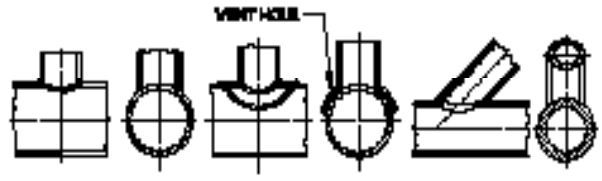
Typical Welded Branch Connections
